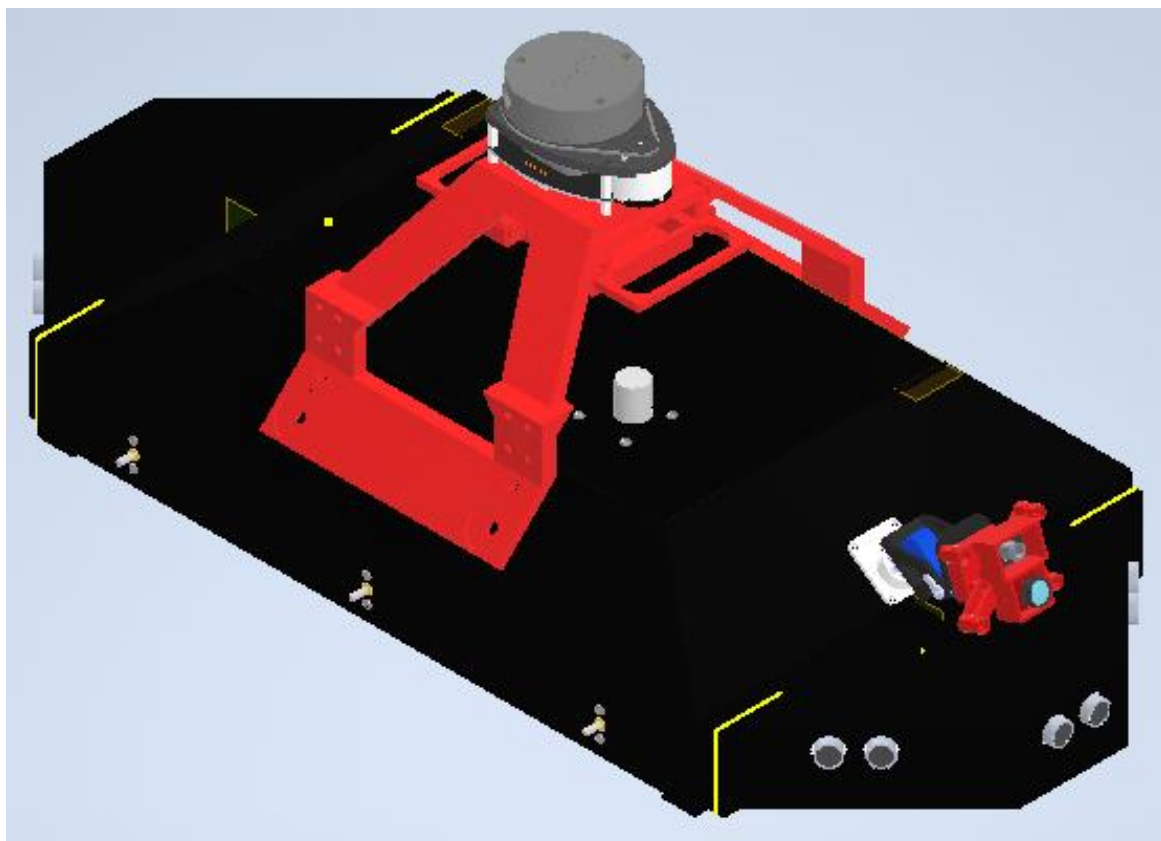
The robot body with the new LIDAR and camera mounts designed from scratch, the air quality sensor drawer and the bumpers (3D design and printing, PLA material)
